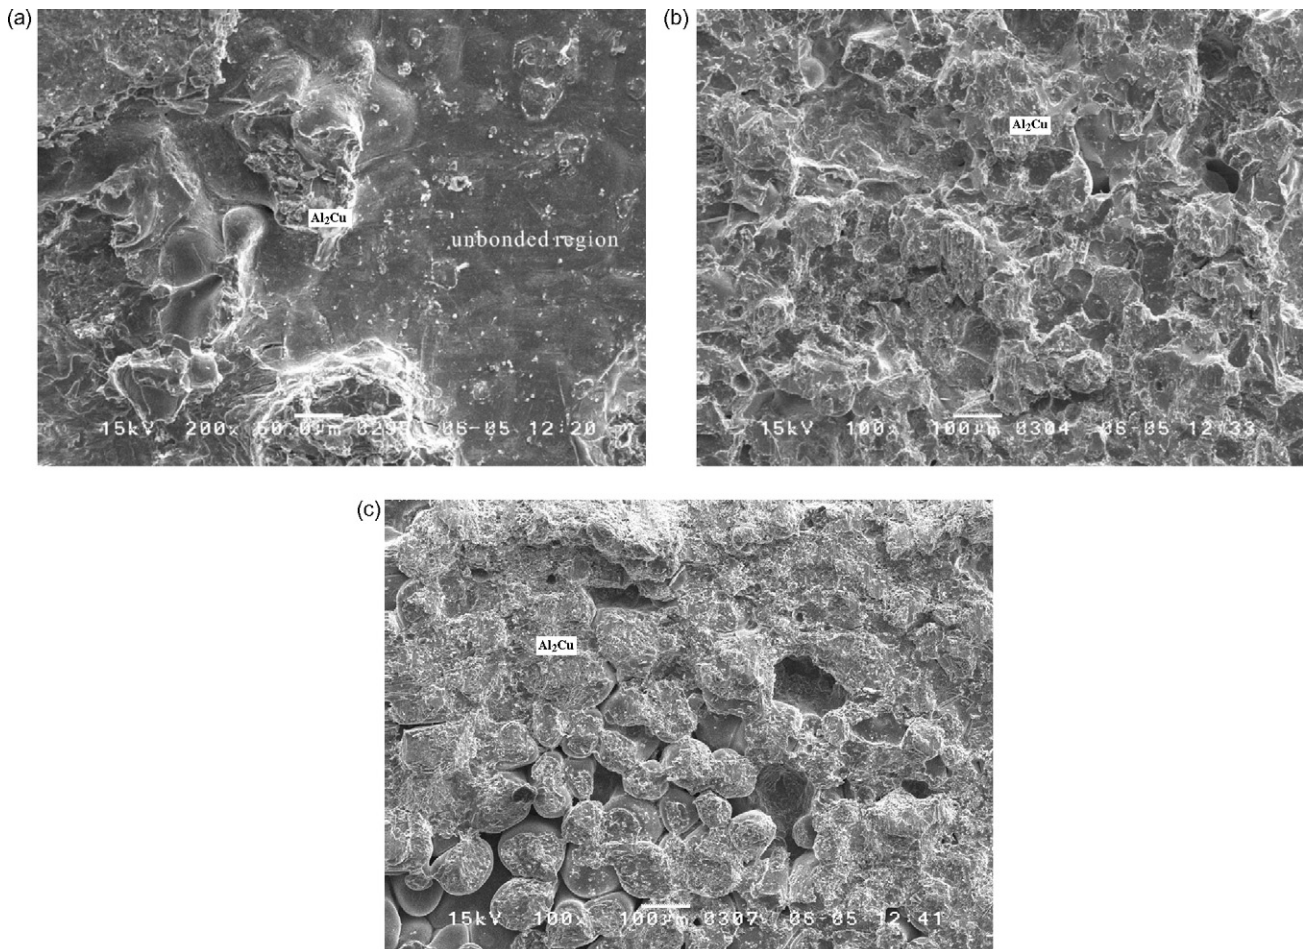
Fractographs of the 6061 aluminum alloy joints bonded with Al–10.8Si–10Cu filler metal at 560 °C for (a) 10 min, (b) 30 min, and (c) 60 min.
